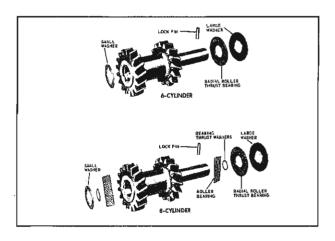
Reverse Idler Gear, Shaft and Thrust Washers
